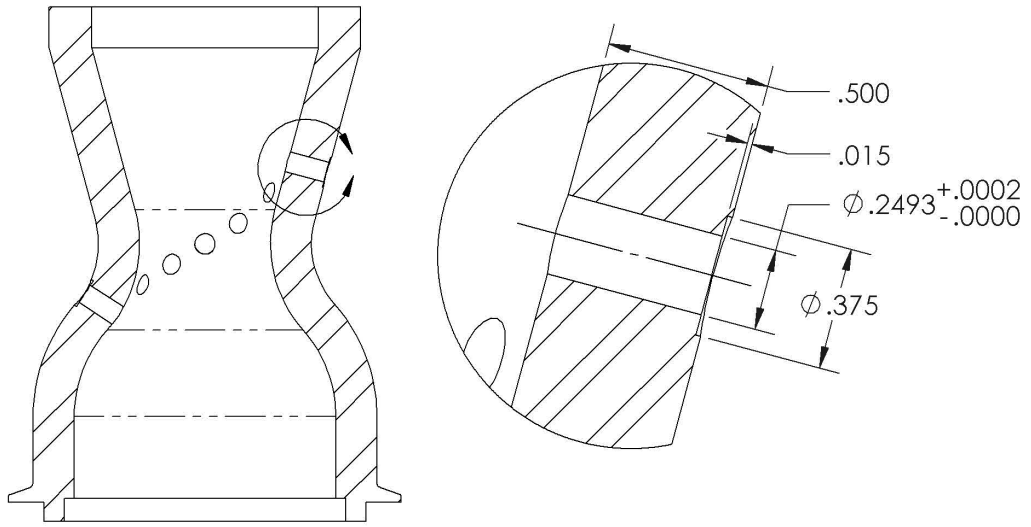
Cal Poly 4:1 nozzle section view and detail view of thermocouple plug interface.
